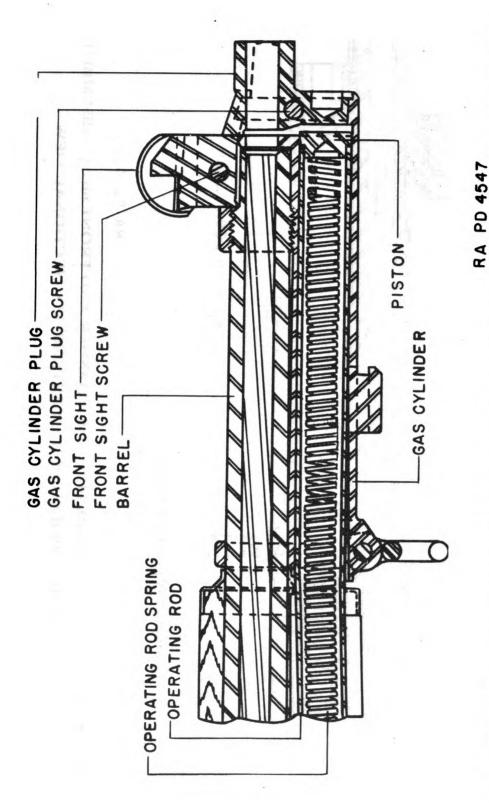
· U.S. RIFLE, CAL..30, M1 - GAS CYLINDER AND FRONT SIGHT ASSEMBLIES
